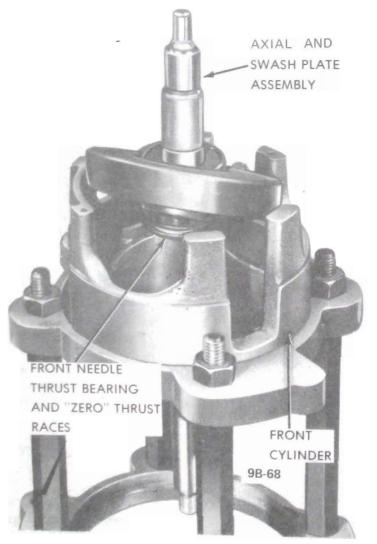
B-77 Shaft and Front Needle Thrust Bearing in Cylinder Half
